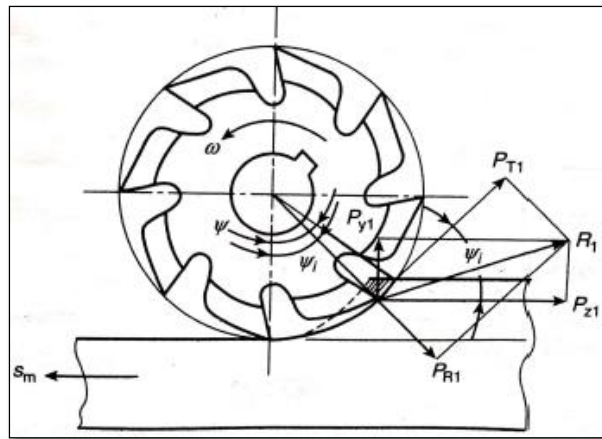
Cutting forces in Up-milling by straight-toothed plain milling cutter under single-tooth engagement [54]
